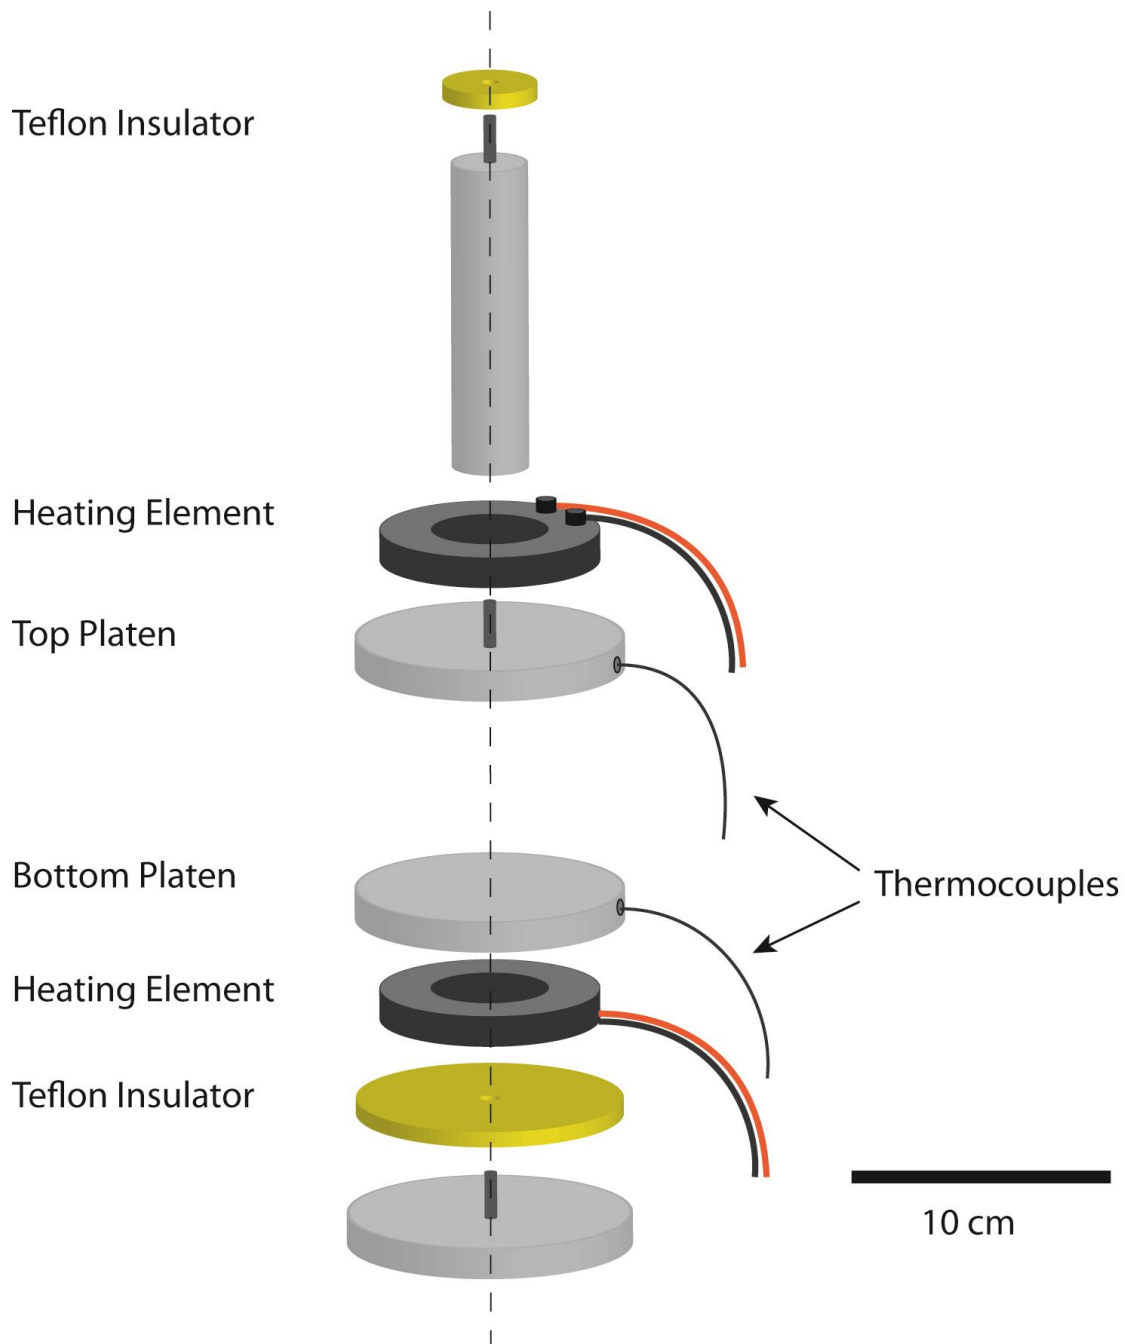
Exploded rendering of the insert designed to convert a hydraulic press into an inexpensive hot embossing machine for easy access to hot embossing of thermoplastic microfluidic devices. Platens machined from 3/8" aluminum stock, thermally insulating 1/4" Teflon sheets, and a 1" wide aluminum force transduction rod were fastened together and to the press with headless screws. Two concentric heating elements are independently regulated by two PID controllers (not shown) that receive feedback from the thermocouples inserted into the platens.
